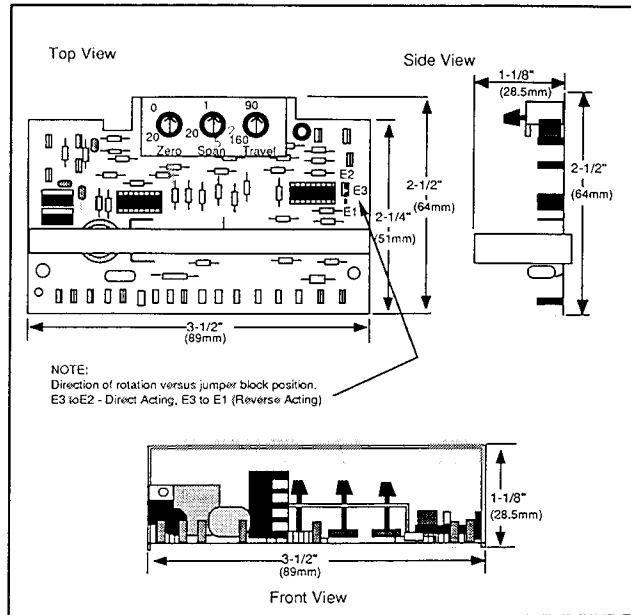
MMC-8000 PLUG-IN CONTROL MODULE DIMENSIONS
